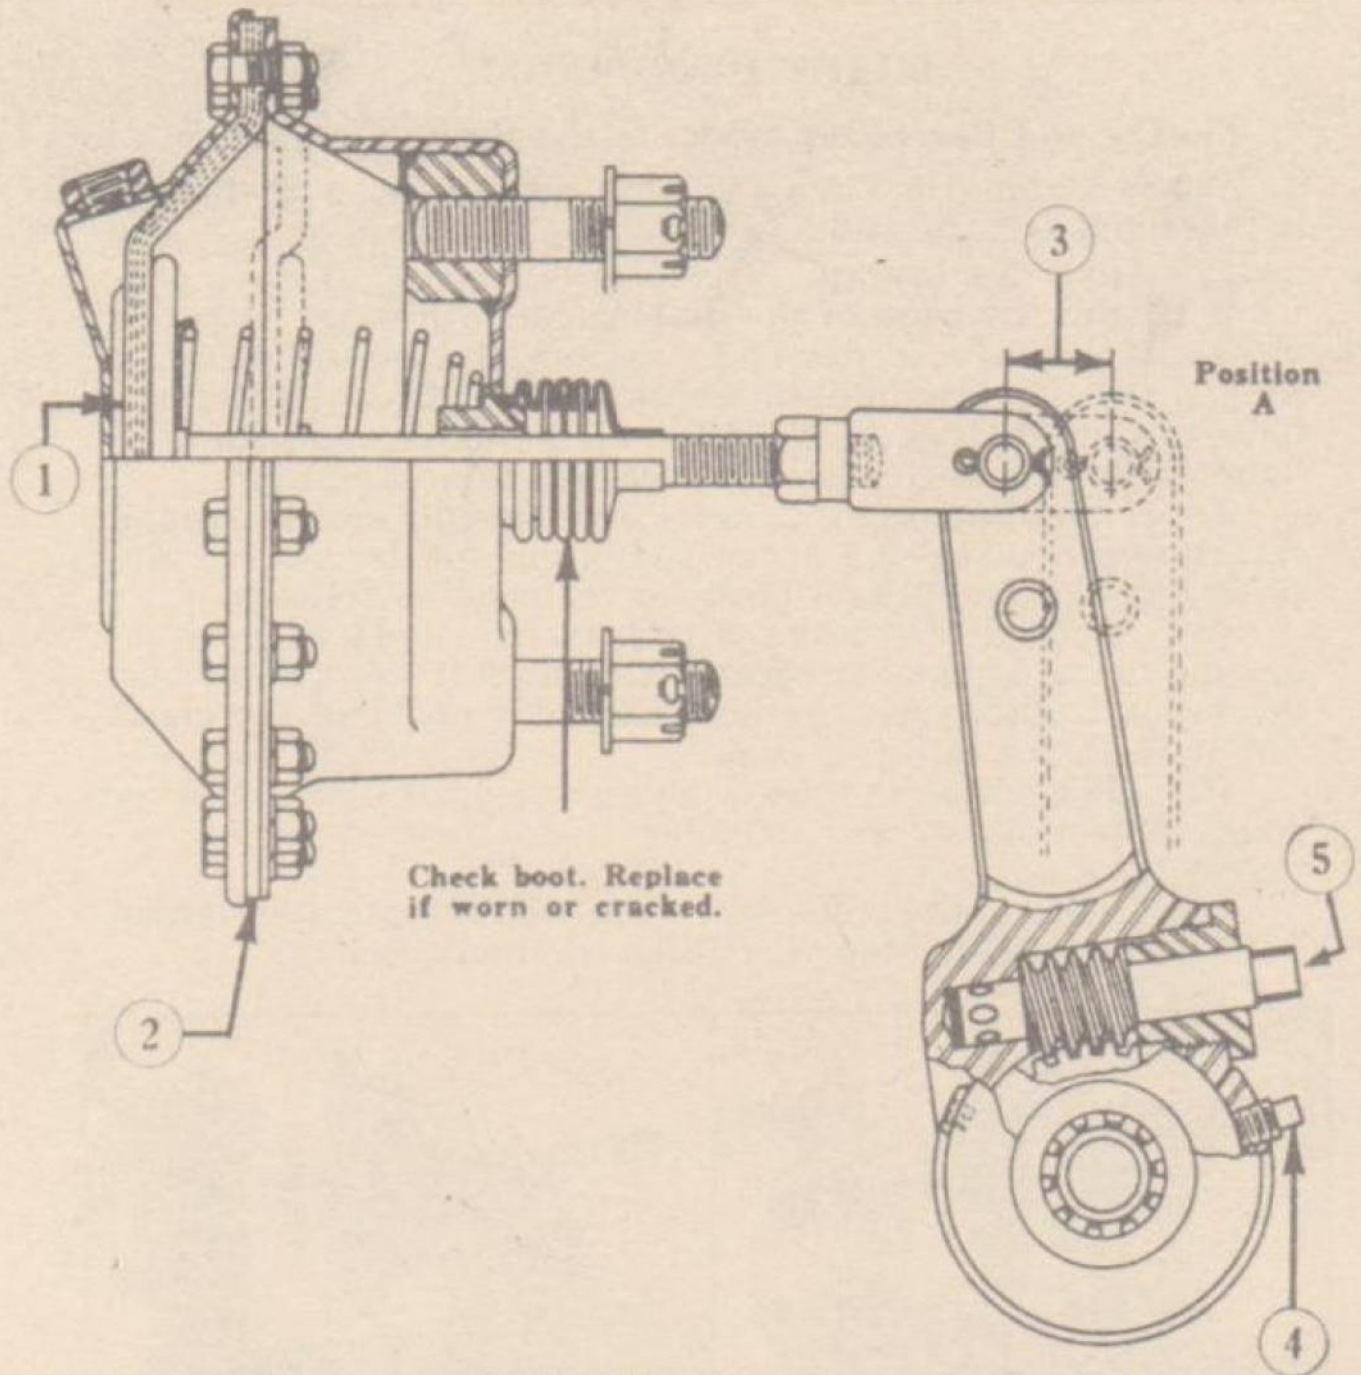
FIGURE B. BRAKE CHAMBER—REPLACING SPRING
